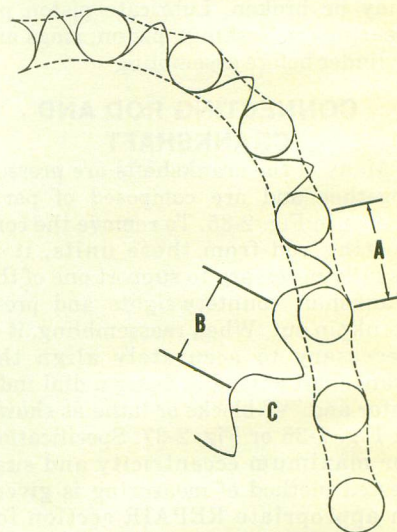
Chain pitch (A) must exactly equal sprocket pitch (B) to prevent excessive wear on bearing edge of sprocket tooth (C). Refer to text.
